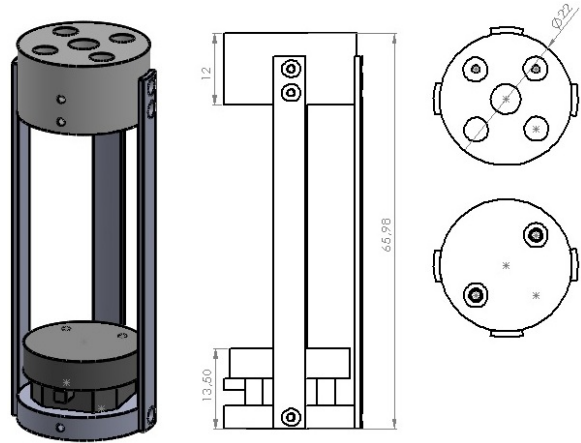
Solidworks model and drawings of the outer frame of the proposed cryostat holder. All dimension are to scale and are in millimetres.
